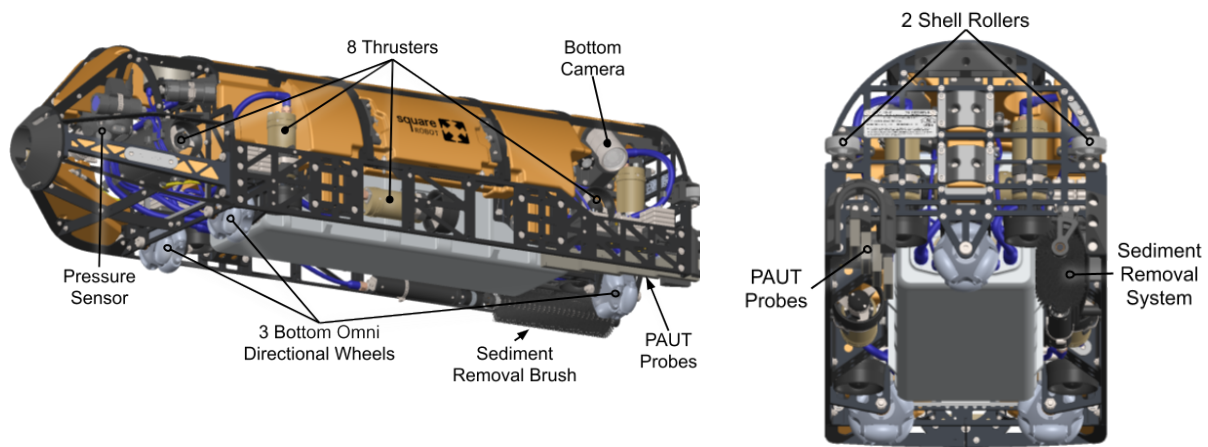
ISO & AFT View of SR-3 Inspection Robot
